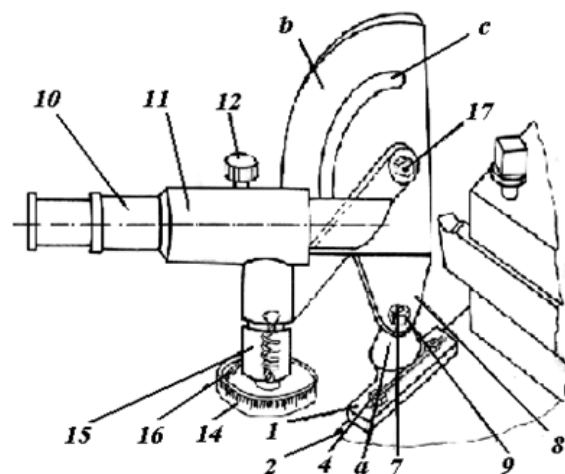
Front view of the optical device for the study of the lathe tool wear
